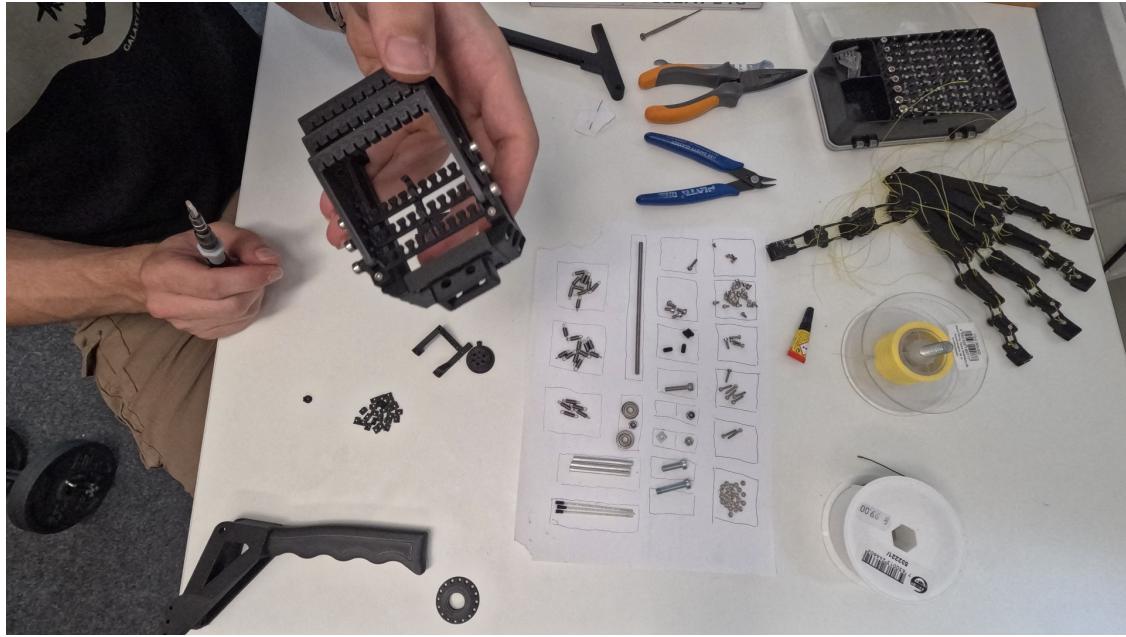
Assembled passive tendon side first for easier access to routing.
